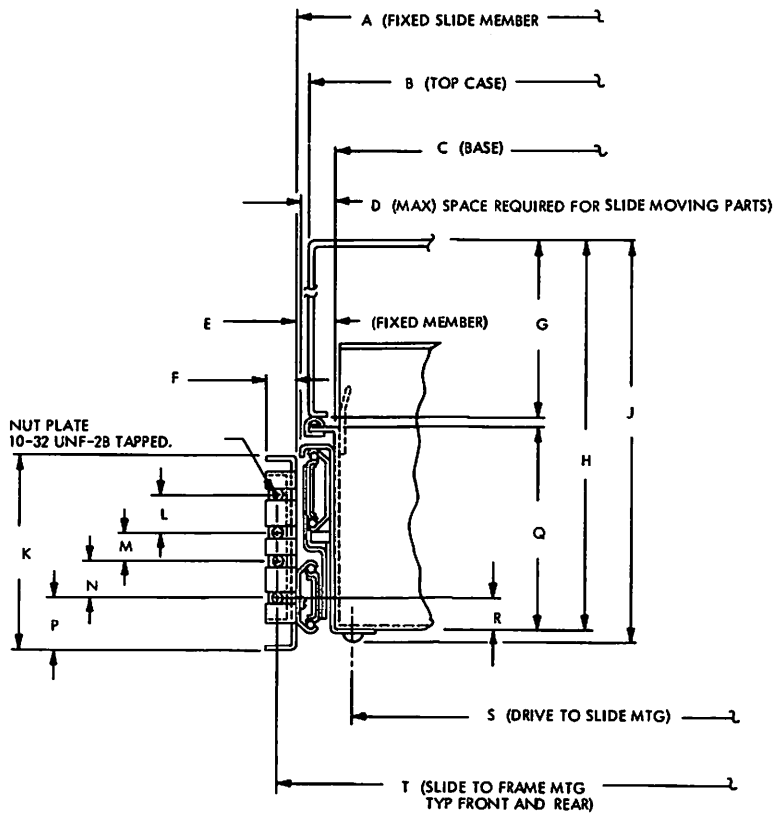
RACK MOUNTING DETAILS (WITH OR WITHOUT SLIDES)
